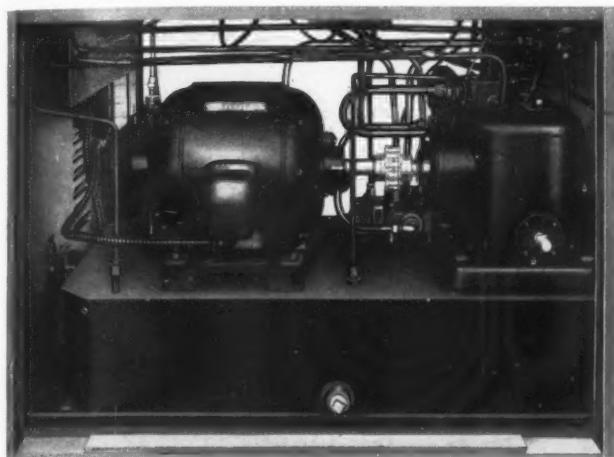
View with front panel removed showing motor and variable volume hydraulic pump
